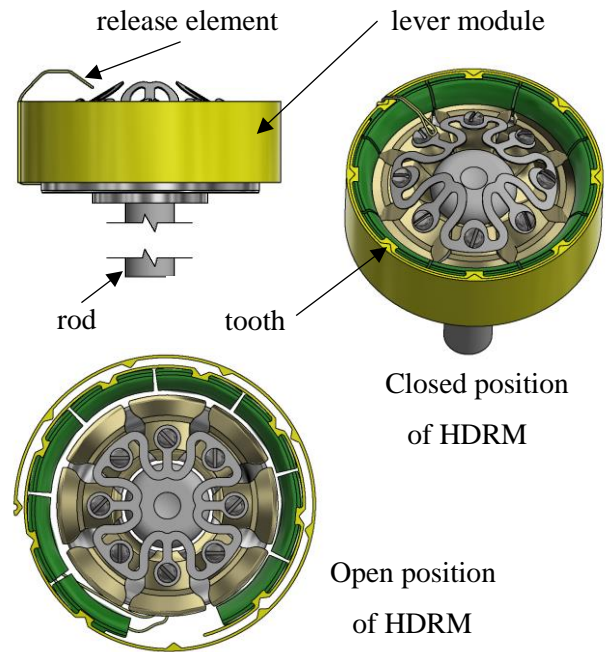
General construction of the HDRM based on the toothed clamp gear.
